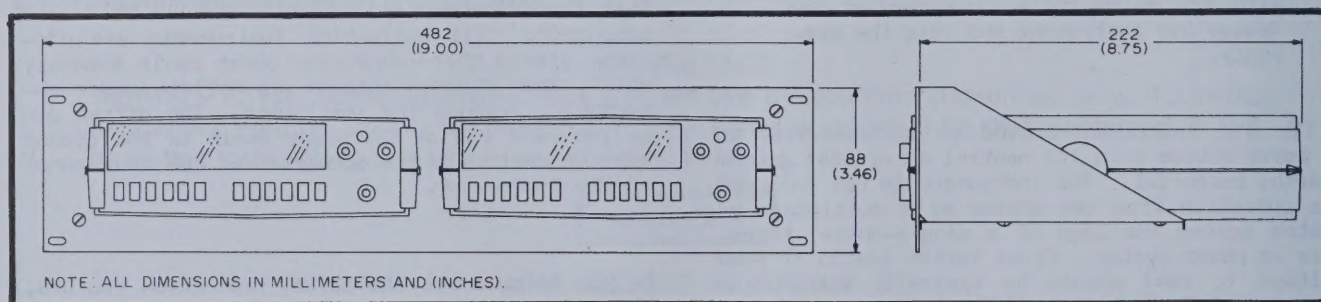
Model 3036A/B Rack Mount, Outline Dimensions
